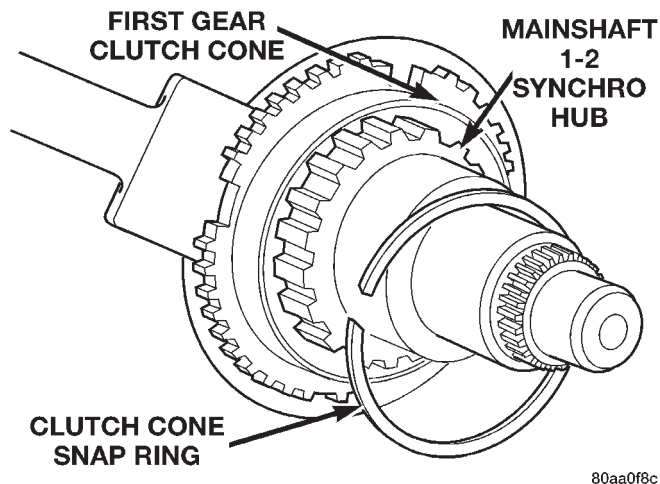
Installing First Gear Clutch Cone Snap Ring
